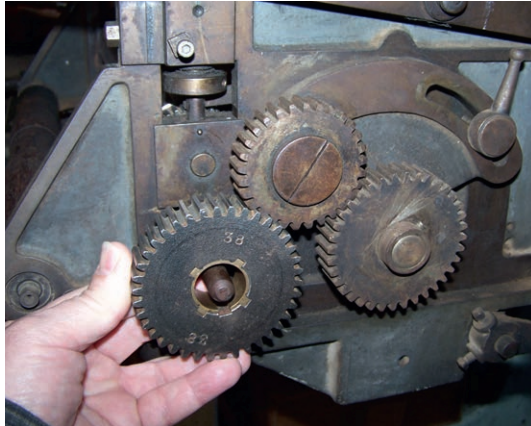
Interchangeable copy-machine gearing photo courtesy of David Krall
